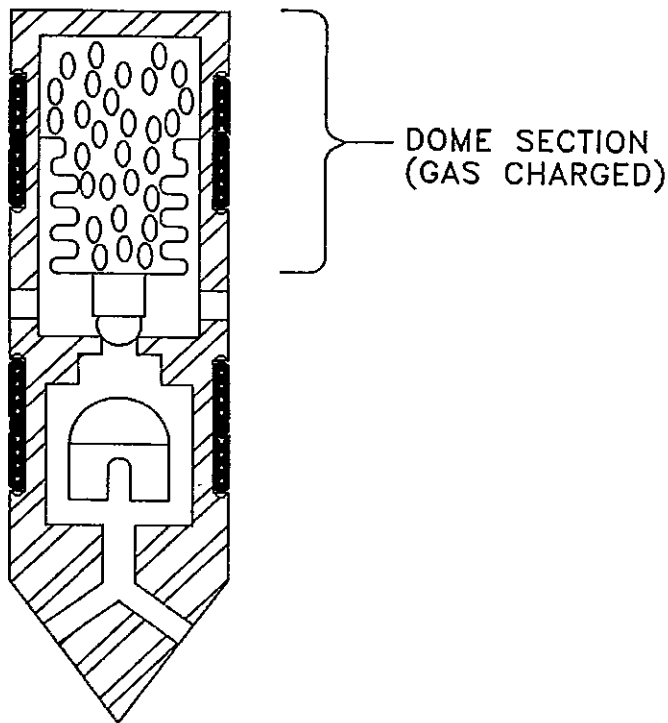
Typical Injection Pressure Operated Gas Charged Valve
